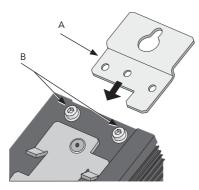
Bulkhead mounting (80A/100A unit shown; 125A similar); 125A similar)
